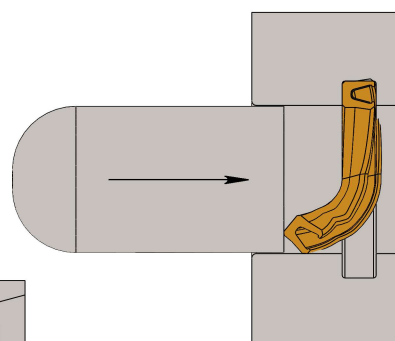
Deform Seal and Apply Force with Pusher Tool Blunt End
